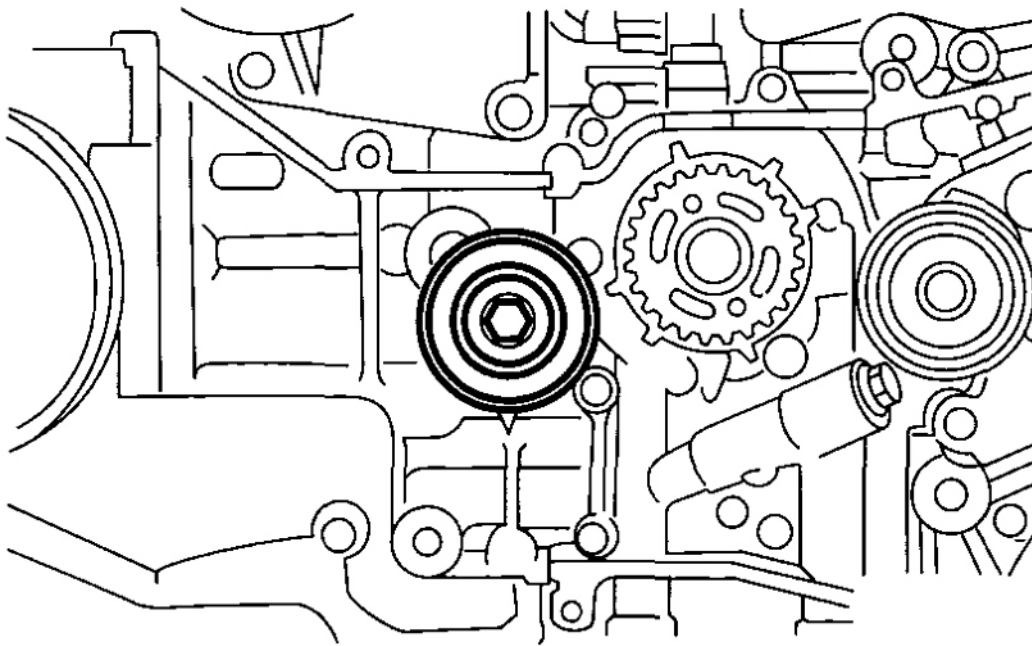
Installing Automatic Belt Tension Adjuster Assembly
